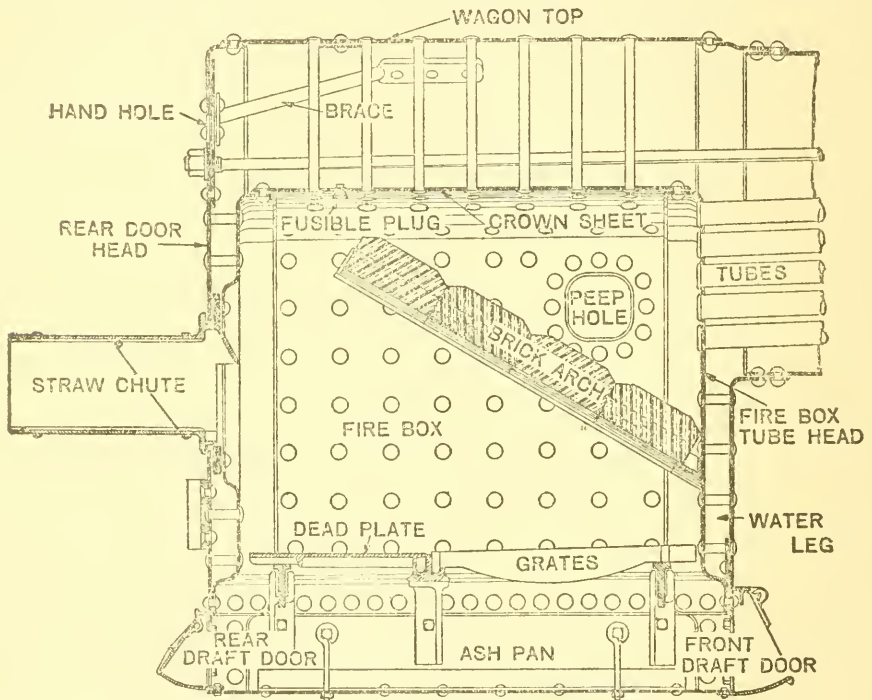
SECTIONAL VIEW OF FIRE-BOX FOR BURNING STRAW.
